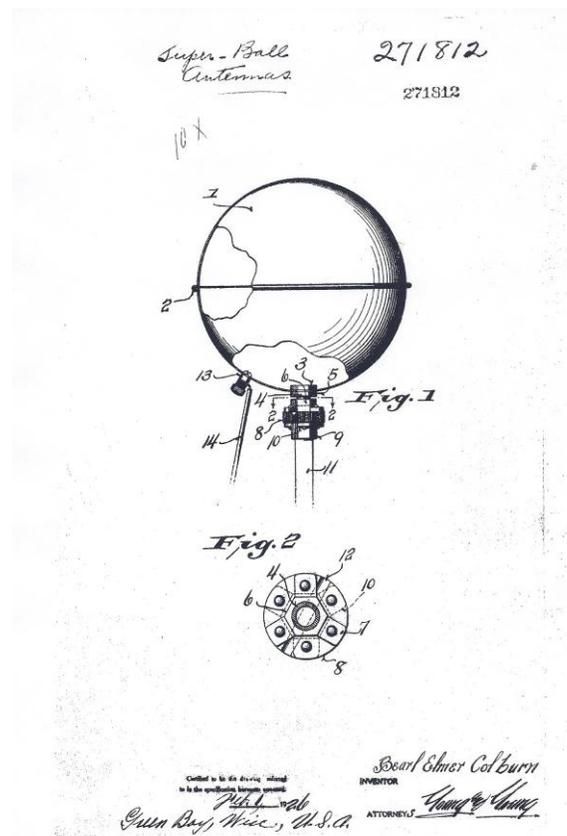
Super-Ball Canadian Patent 271812 Drawing
